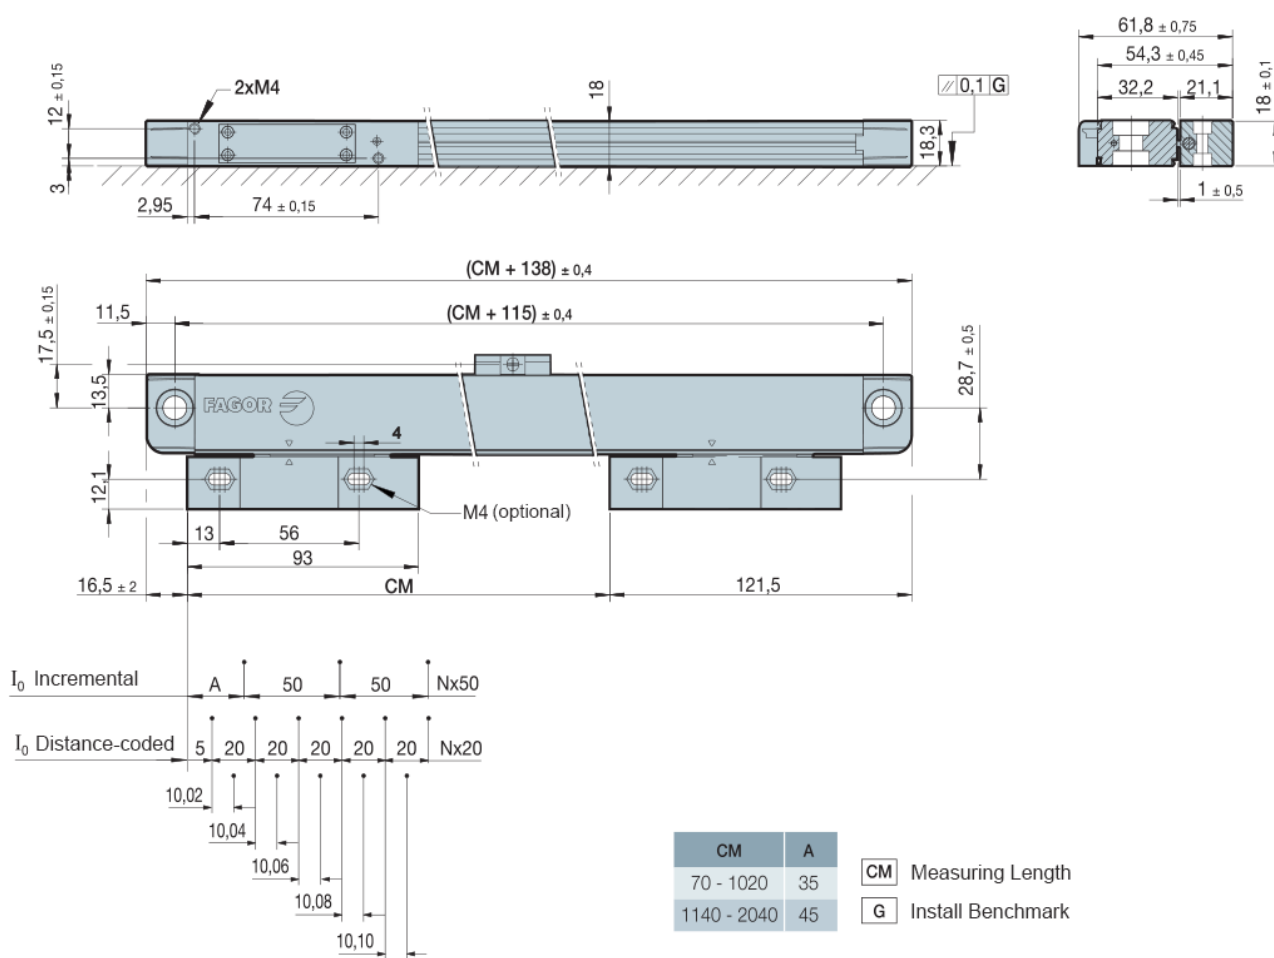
Dimensional drawing of FAGOR incremental S2 series scale
